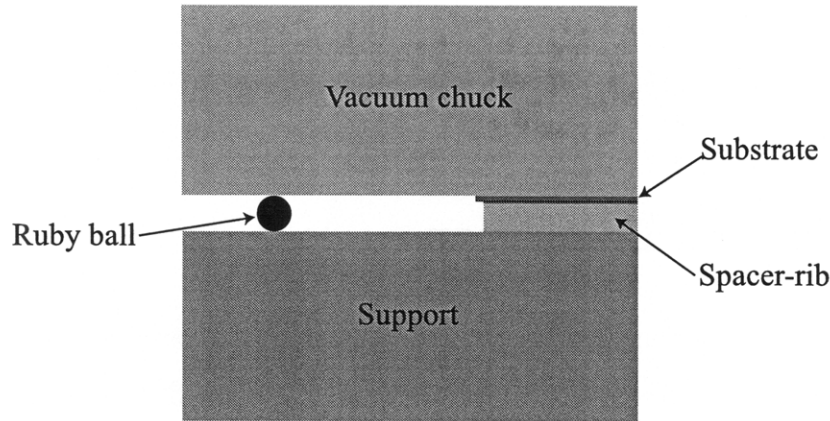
Cross-sectional view showing a ruby ball controlling the distance between the support and the vacuum chuck
